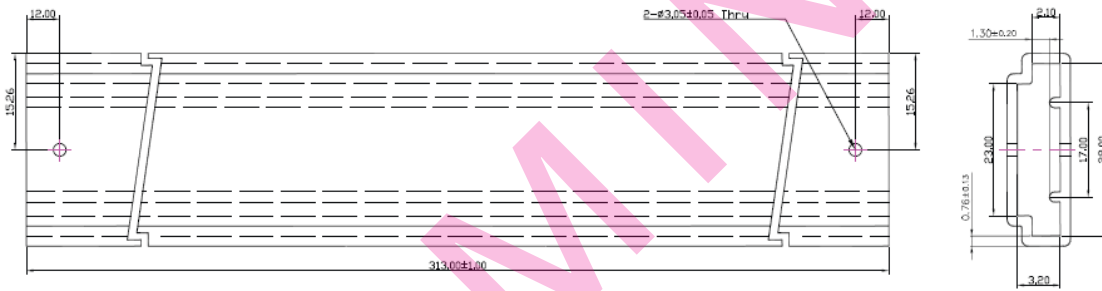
Tube dimensions for L2C5-xxxx1202EH600.
